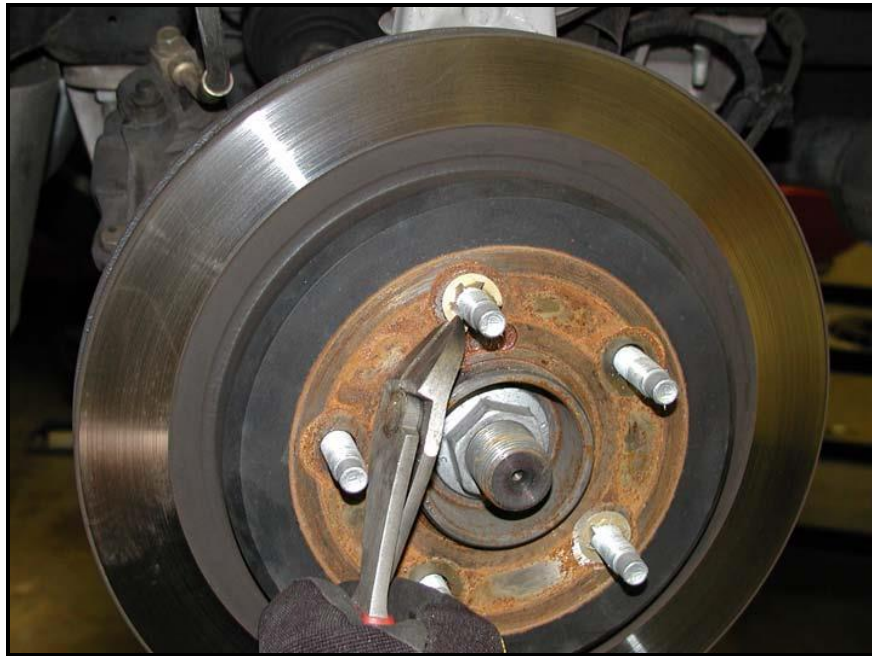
Removal of the Tinnerman nuts prior to rotor removal
